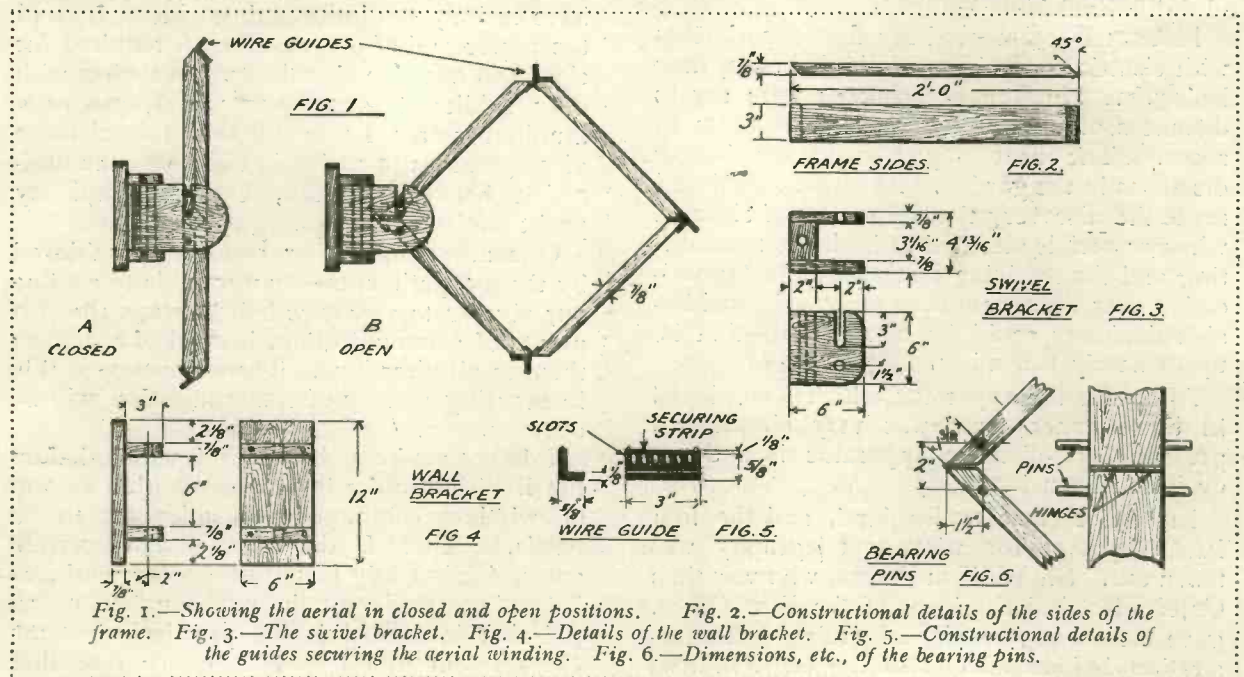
Showing the aerial in closed and open positions. Fig. 2.—Constructional details of the sides of the frame. Fig. 3.—The swivel bracket. Fig. 4.—Details of the wall bracket. Fig. 5.—Constructional details of the guides securing the aerial winding. Fig. 6.—Dimensions, etc., of the bearing pins.
